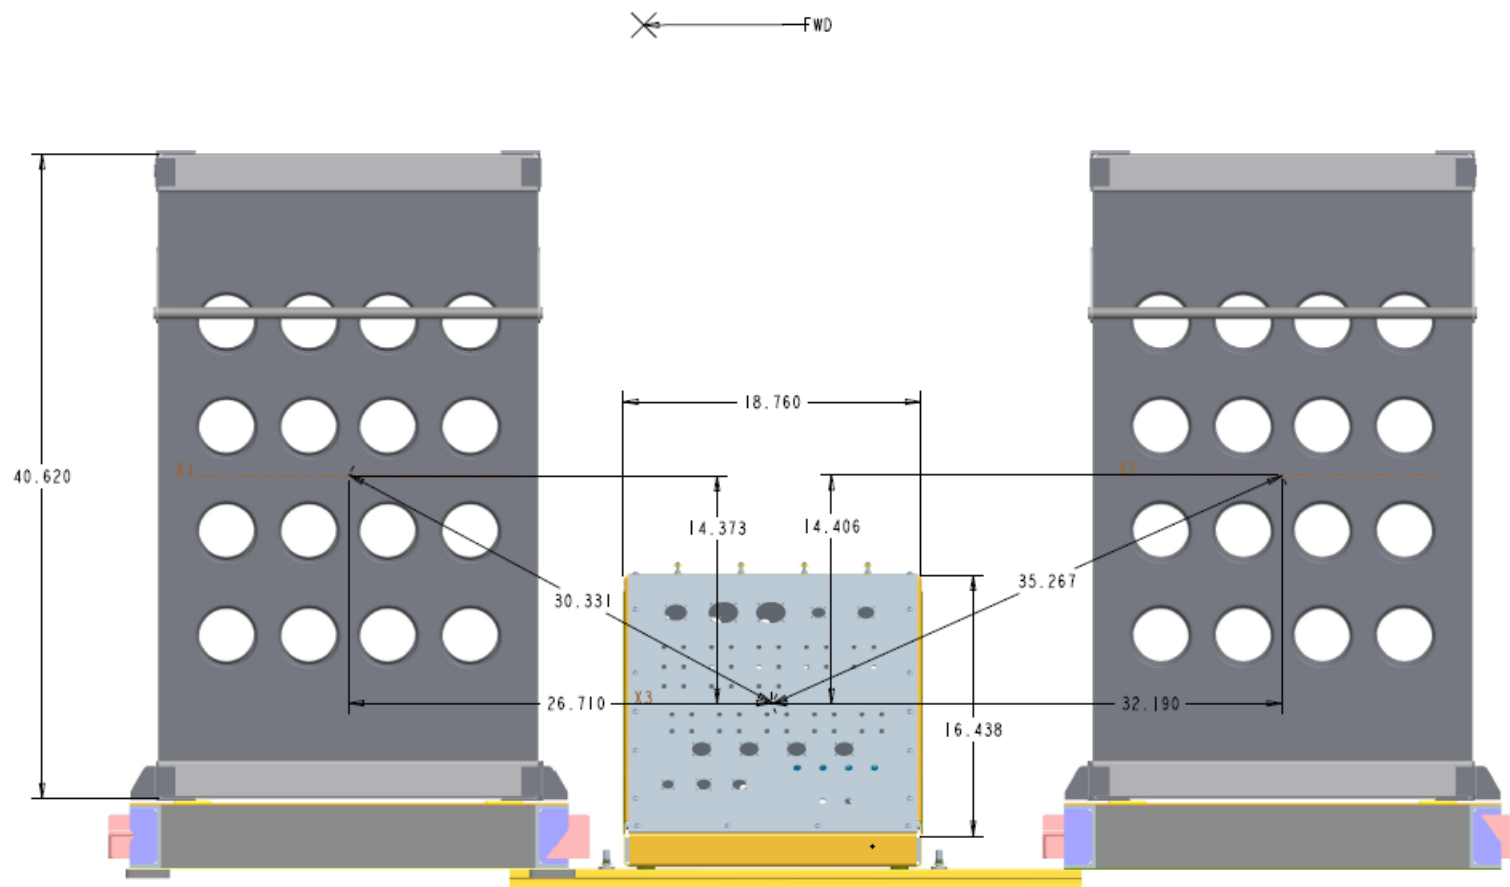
Side view of PI racks and PI Patch Panel (View looking starboard)
